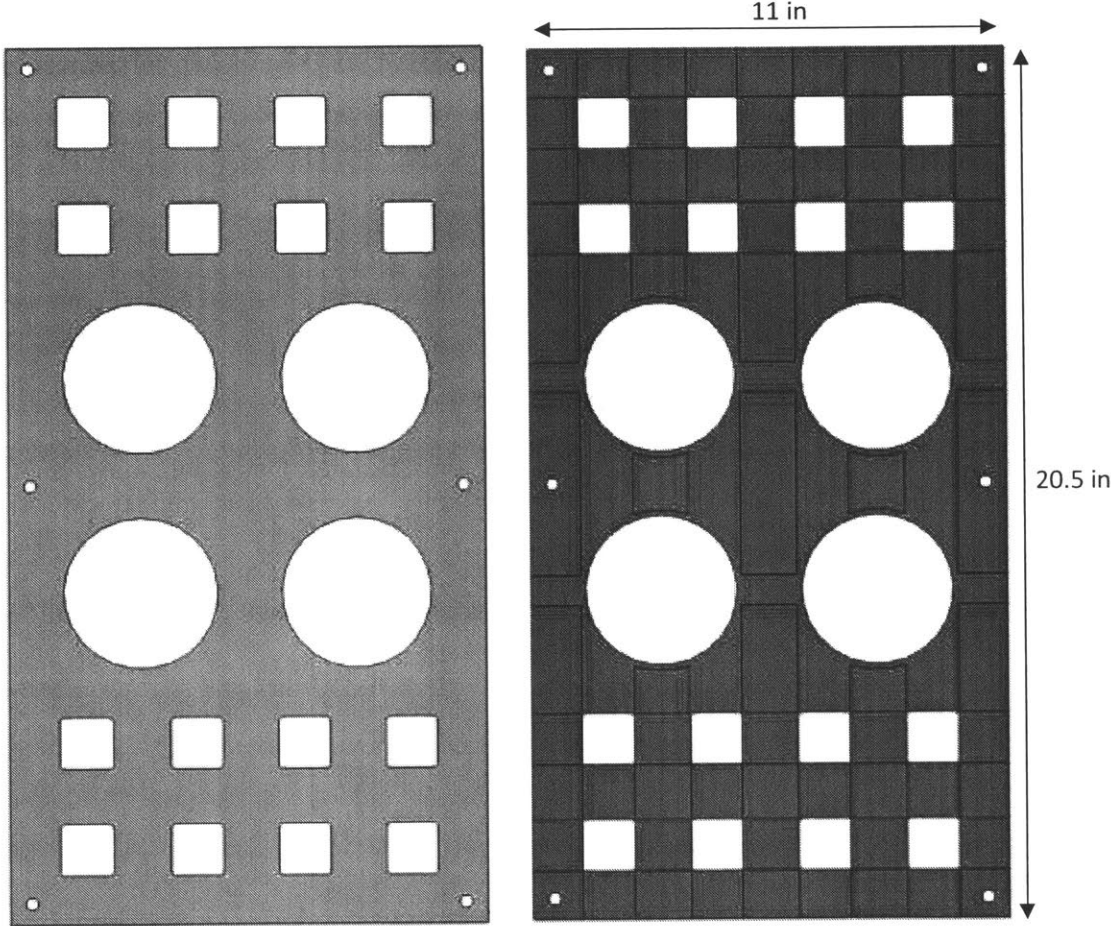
Mask plate component of fixture. On the left is the top view of the mask plate and on the right is the bottom view of the mask plate.
